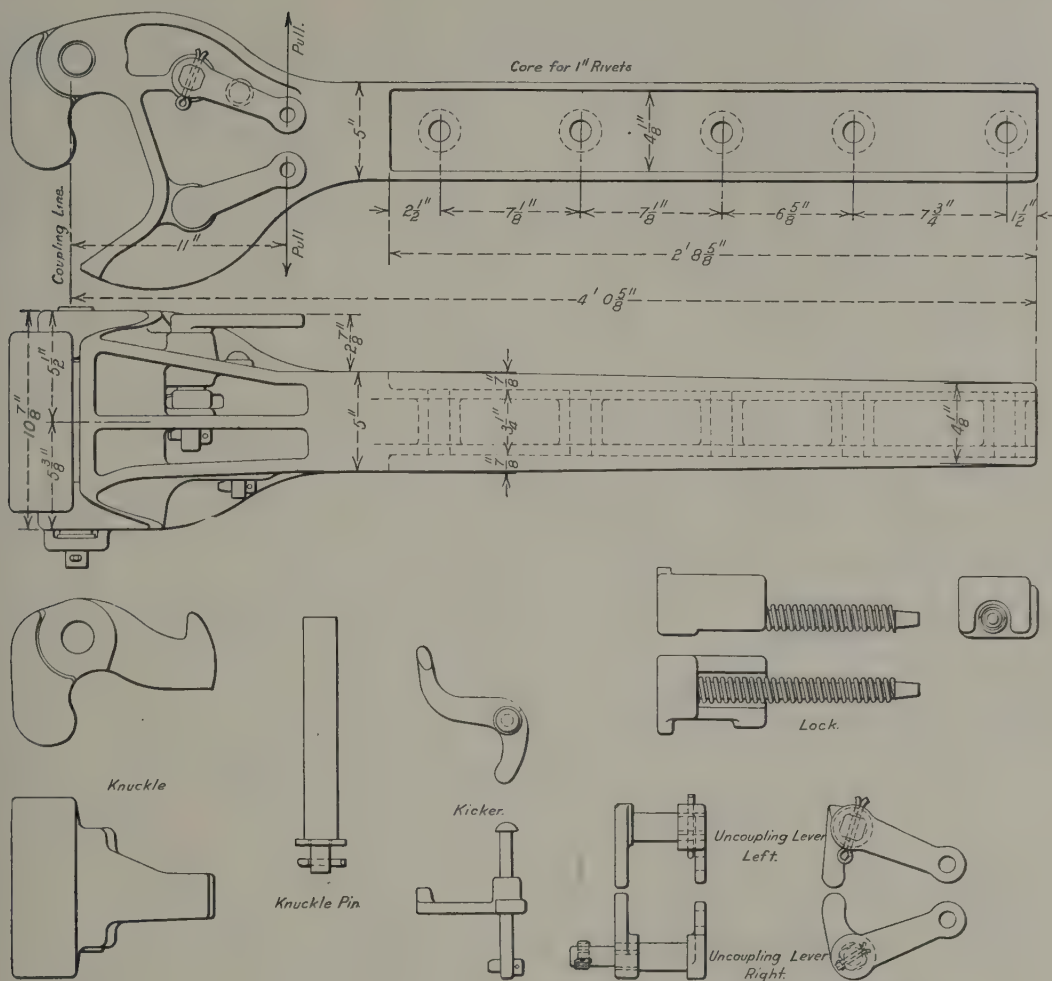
Double Top Operated Passenger Coupler. Gould Coupler Company.
